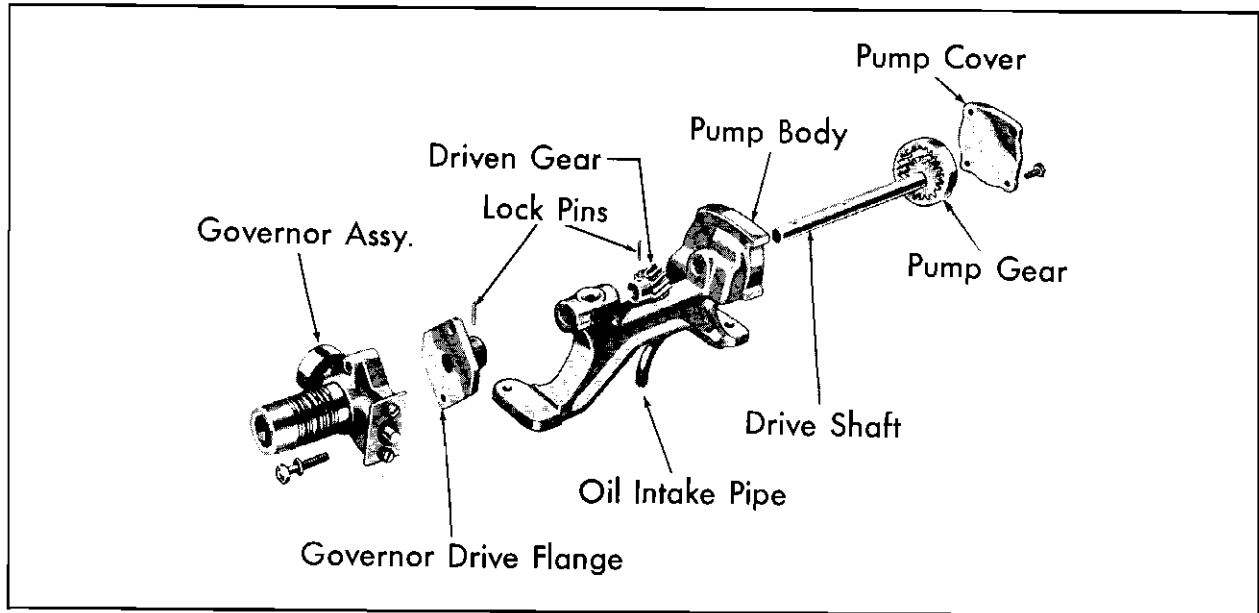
Rear Oil Pump and Governor - Disassembled
